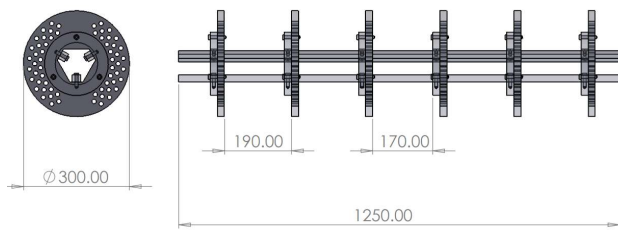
A SolidWorks sketch of the mechanical support, the dimensions are given in [mm].
